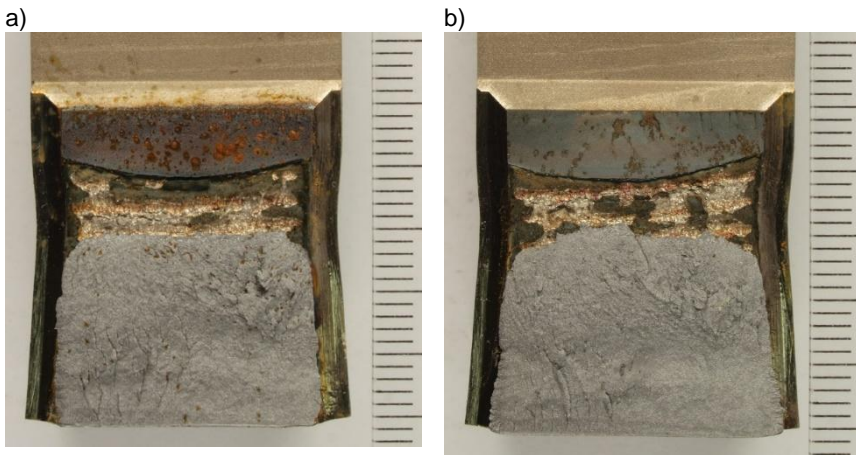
Photographs of fracture surfaces of the J-R test specimens, tested in as-received condition and in T-S orientation, a and b. Crack initiates in LAS, after which it deflects to the weld metal side and occasionally back to LAS side.
